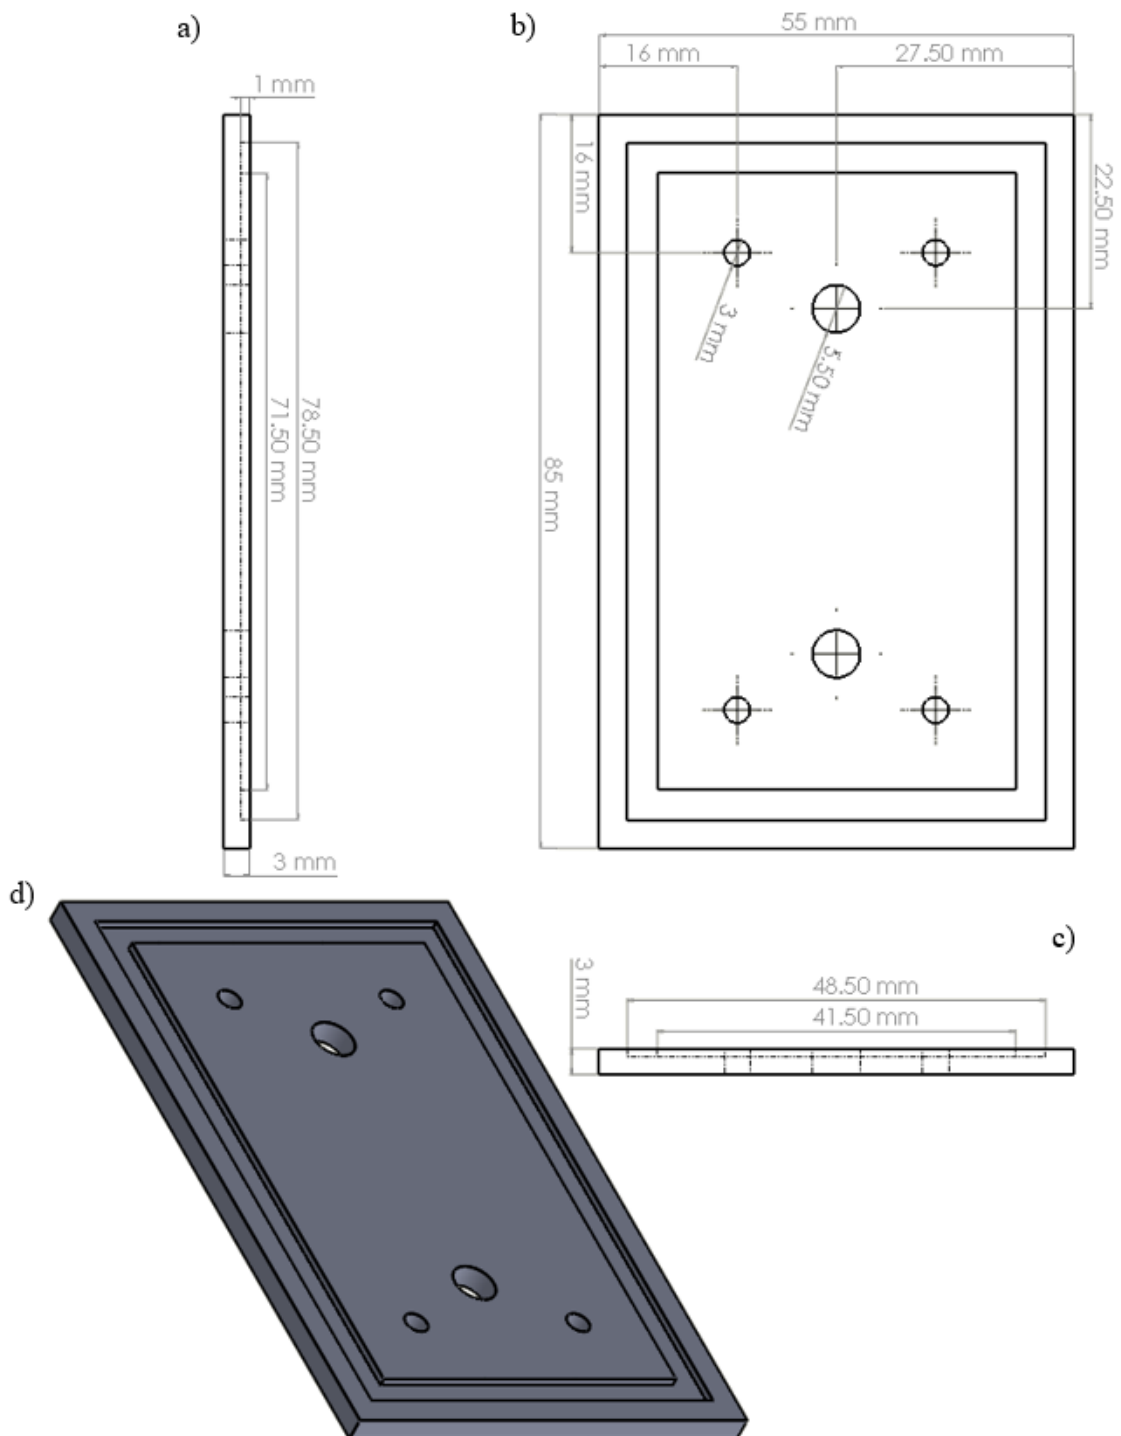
3D design of cap of sample holder with the size of 2 cm x 2.5 cm a) Left view, b) Top view, c) Front view, d) 3D view.
